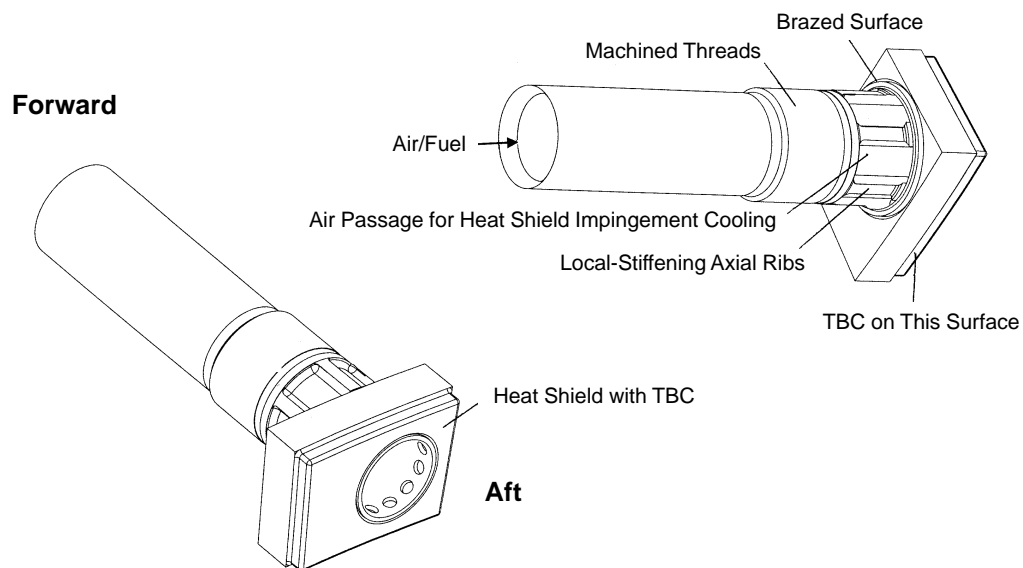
Full-Scale MRA Sector IMFH/Heat Shield Design
